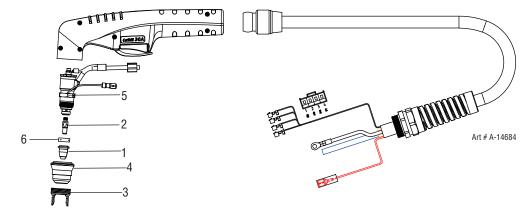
CutSkill 30A Plasma Torch Replacement Parts
